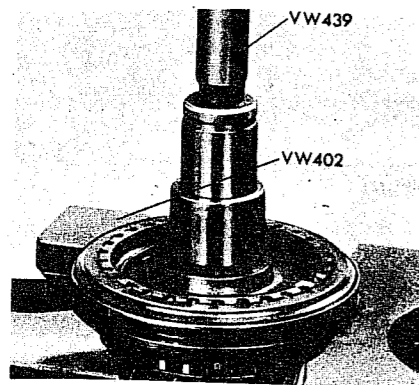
Pressing the 3rd speed gear wheel and synchroniser off the main drive shaft.
